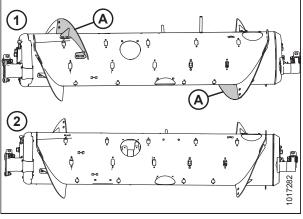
Auger Configurations (Rear View) 1 - Medium Configuration 2 - Wide Configuration
